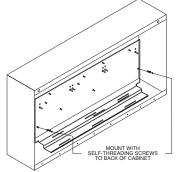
TYPICAL MOUNTING HOLE LOCATIONS:
